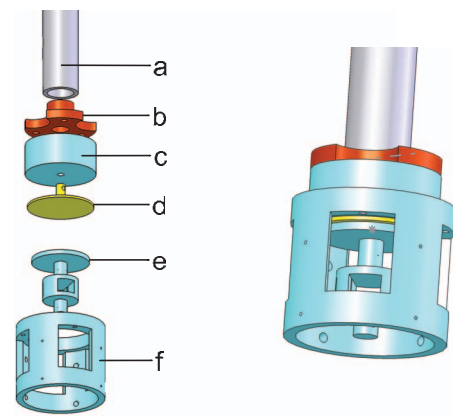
(Right) Plastic magnetometer. (Left) The two assemblies that form the magnetometer: the rod assembly includes (a) hollow stainless steel rod from the mixing chamber to the center of the magnet, (b) oxygen free copper adapter, (c) threaded Tufset piece, and (d) top plate of the capacitor made of brass. The magnetometer assembly is entirely made of Tufset and includes (e) sample holder + movable capacitive plate and (f) body.
